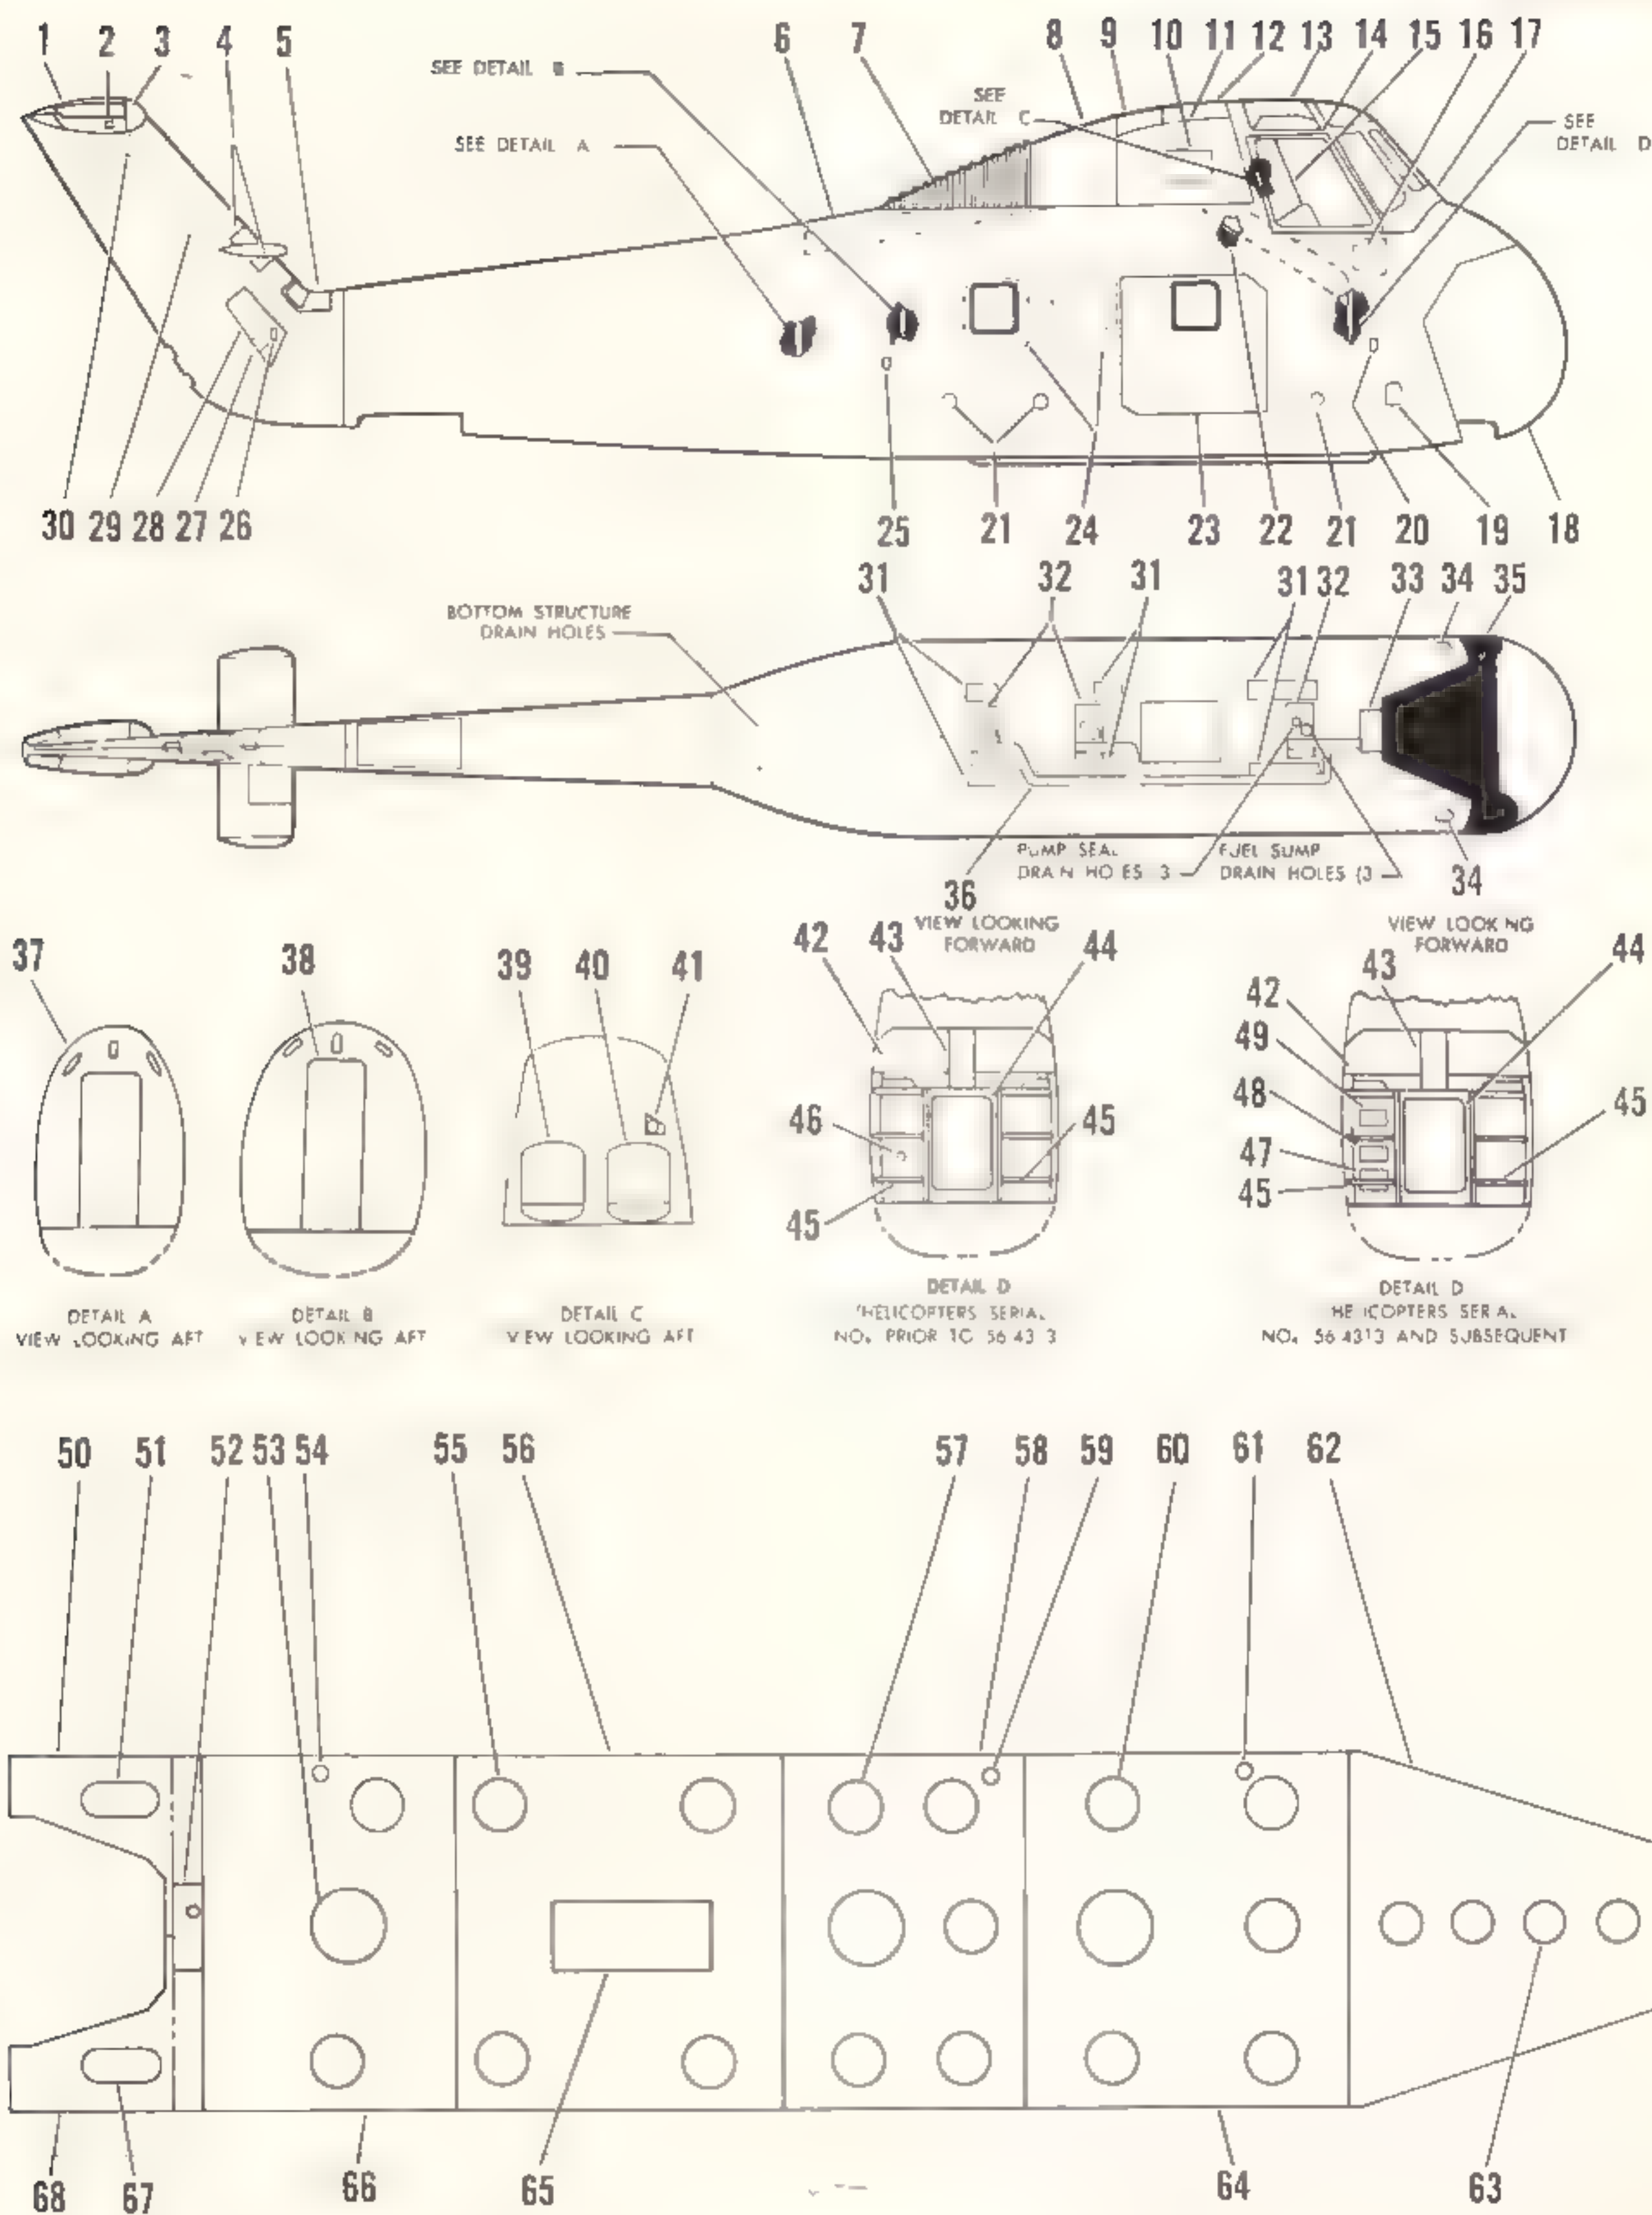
Access and inspection provisions (Sheet 2 of 2)
